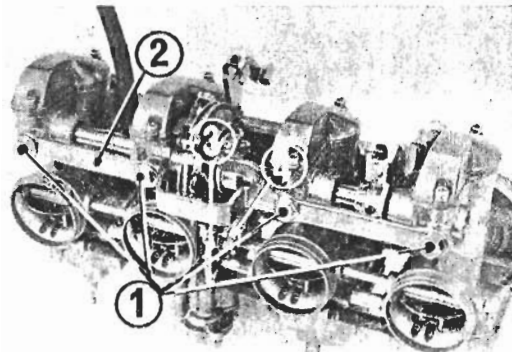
(1) Bolt (2) Rear stay (3) Choke relief spring (4) Choke lever
